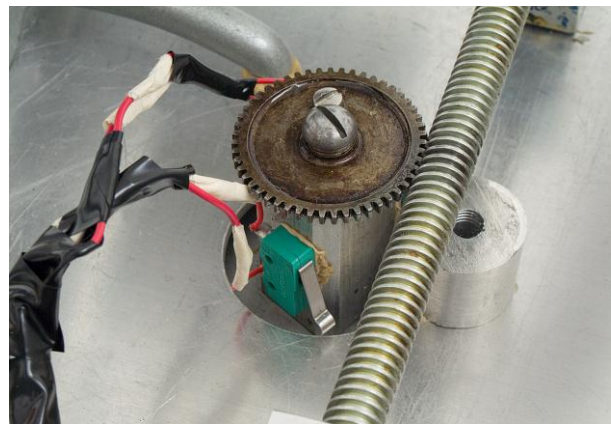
Worm Gear Used to Control Rotation Angle.
